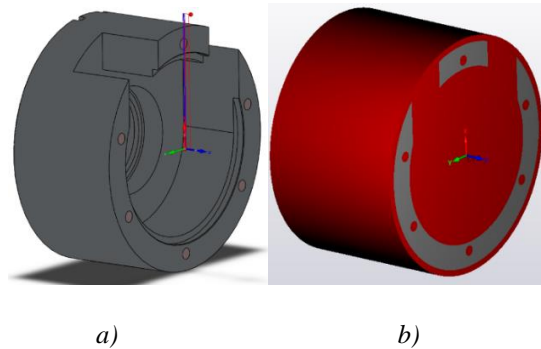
First side of Body CAD model (a) Second side of Body CAD model (b)
